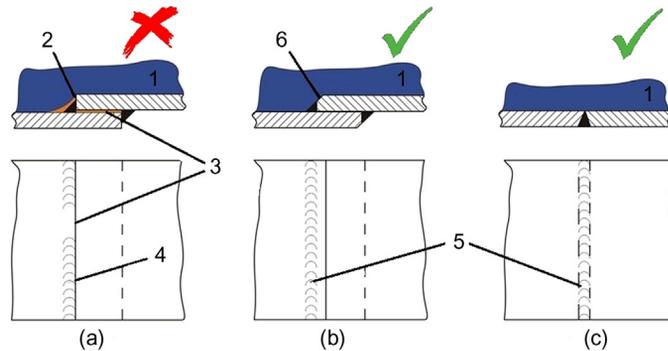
(a, b) In the product contact area (1), product debris may become trapped at step (2) and in the crevices and metal-to-metal contact areas between the seams (3), if overlapped sheets of metal are intermittently welded (4) instead of continuously welded. (b) Overlapped sheets of metal must have continuous welds (5) and sloped edges (6) for easy cleaning. (c) However, it is still better to avoid overlapping sheets of metal, and to give preference to smooth continuously welded sheets (Lelieveld et al., 2003; Hauser et al., 2004b).
